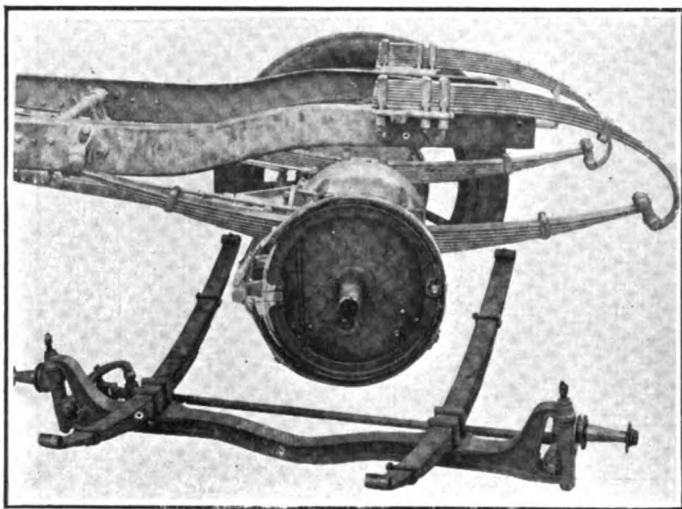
Showing suspension of National front and rear axle, as well as brake construction and differential in perspective
